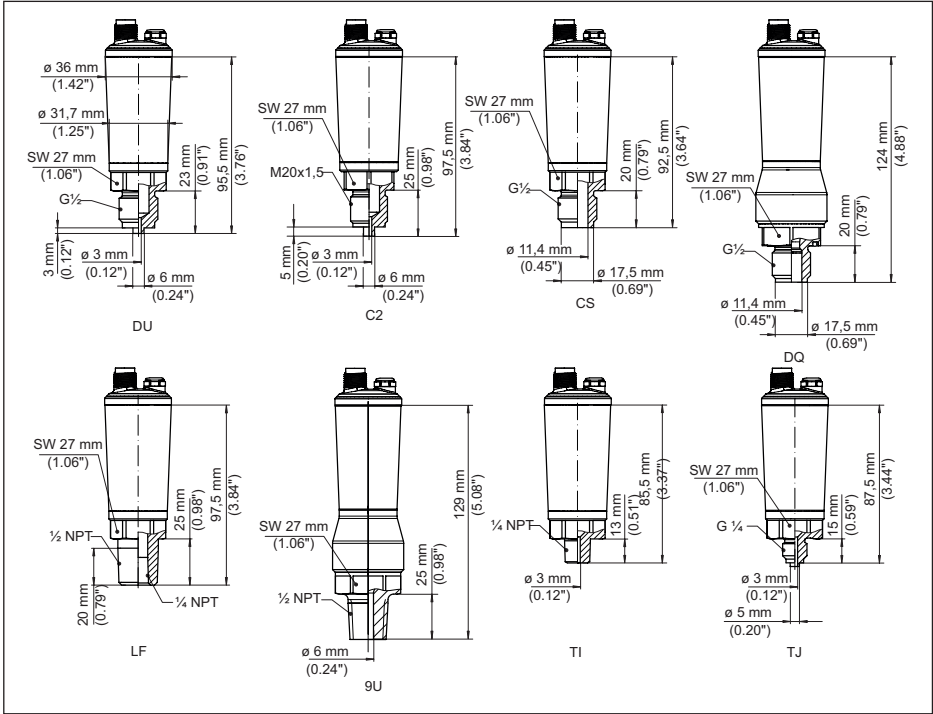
VEGABAR 28, threaded fitting not front-flush
